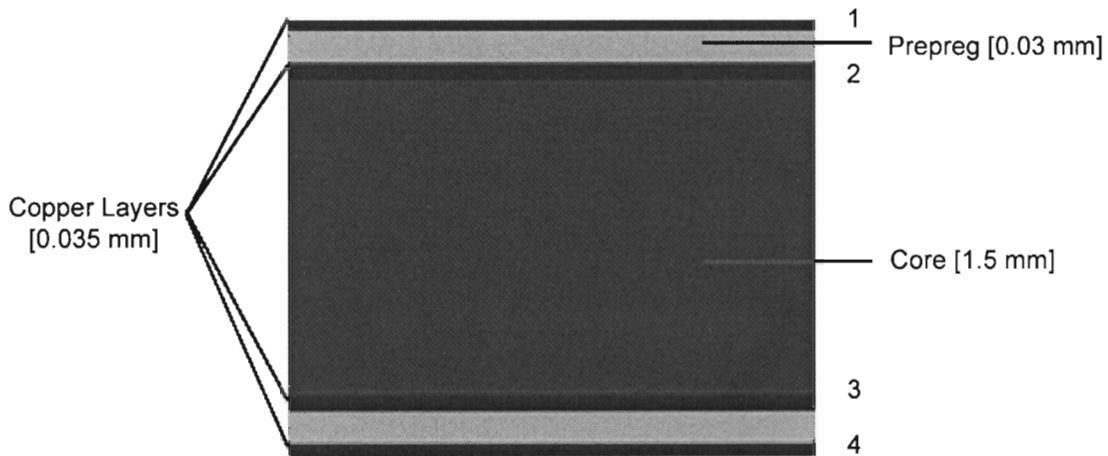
Version 2 PCB cross-section showing layer positions and thicknesses.
